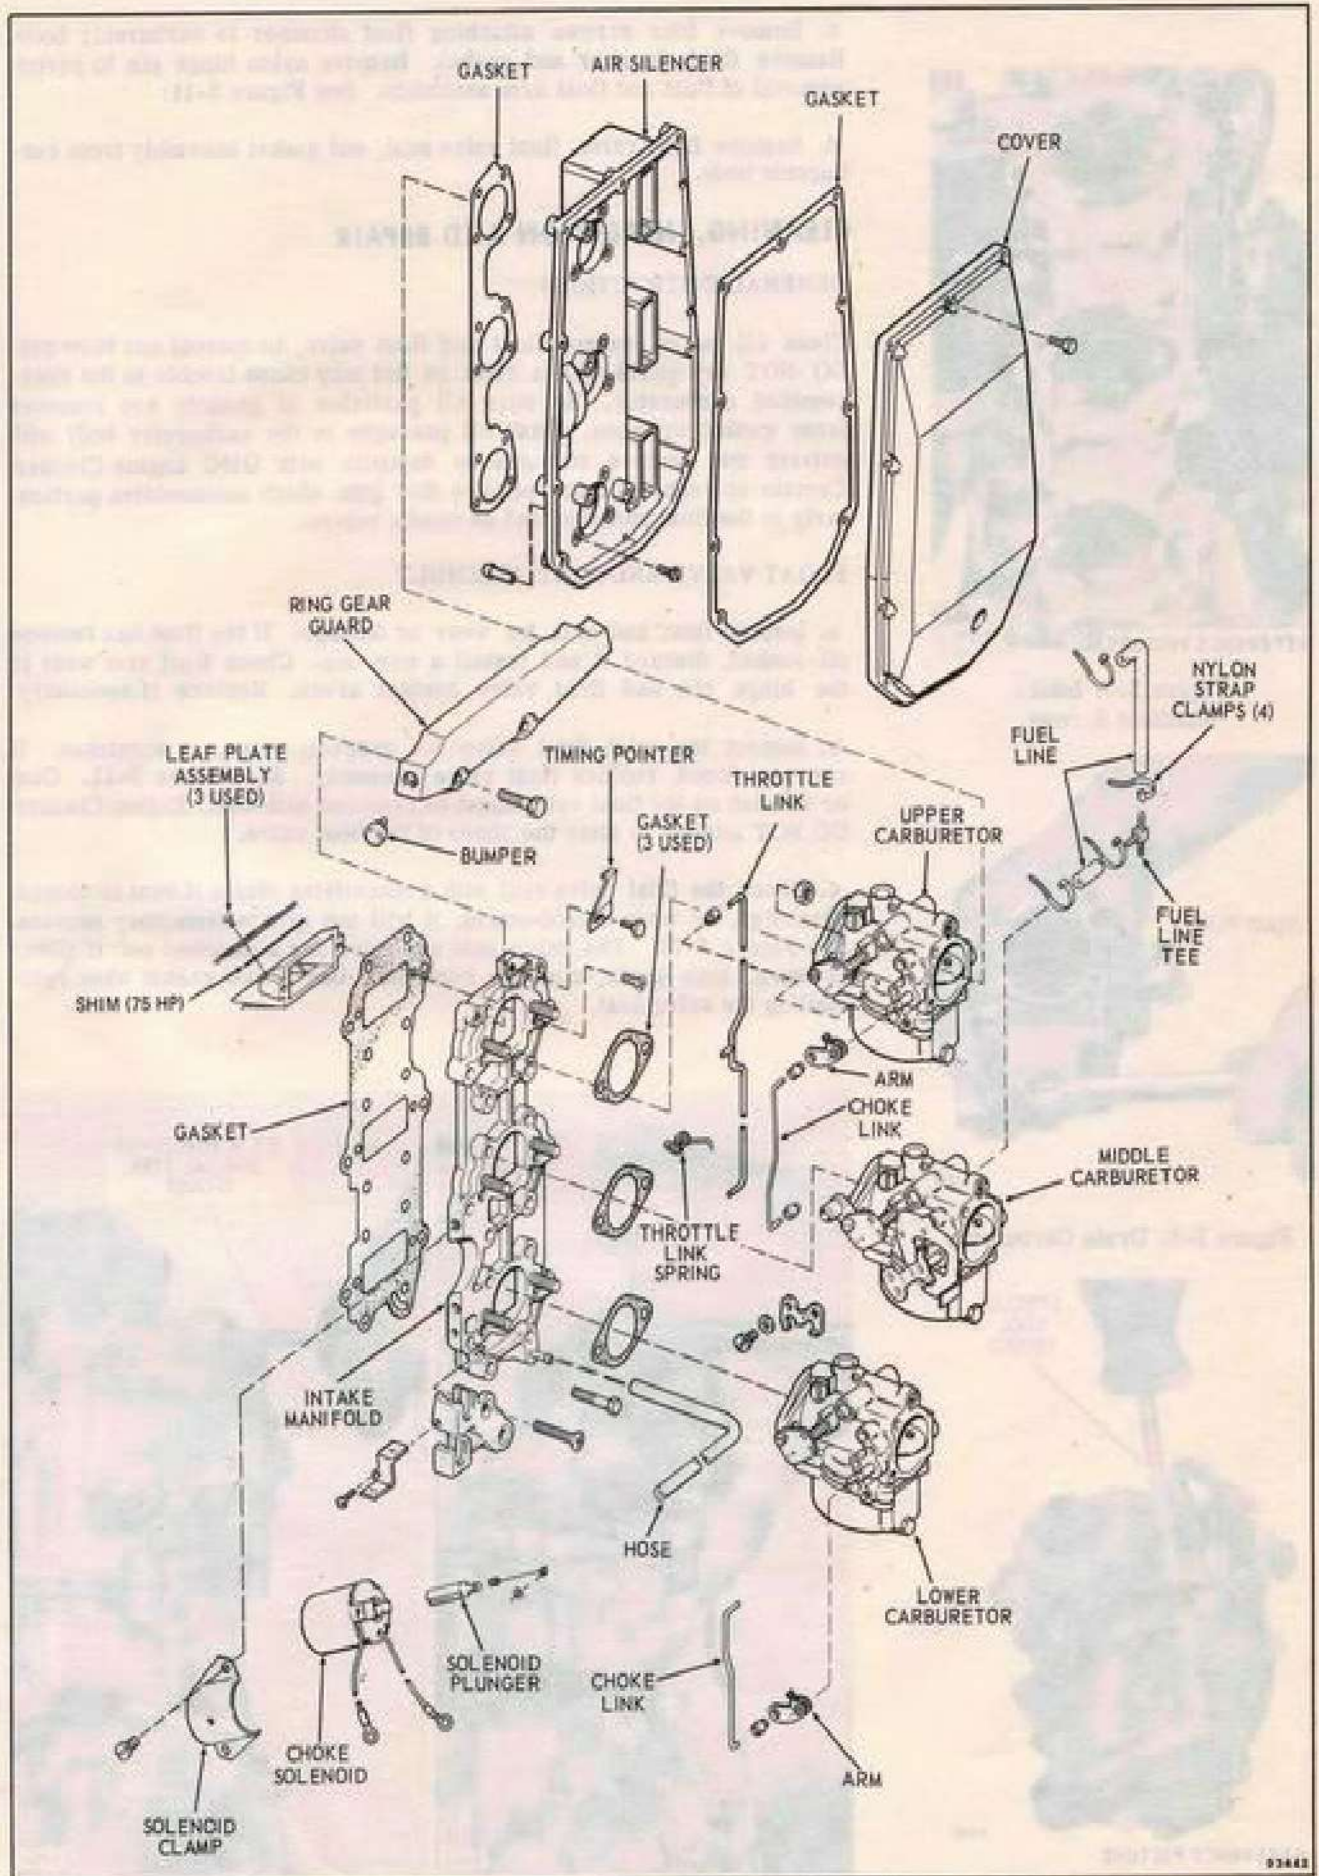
Air Silencer, Carburetors, Intake Manifold, and Leaf Valves
